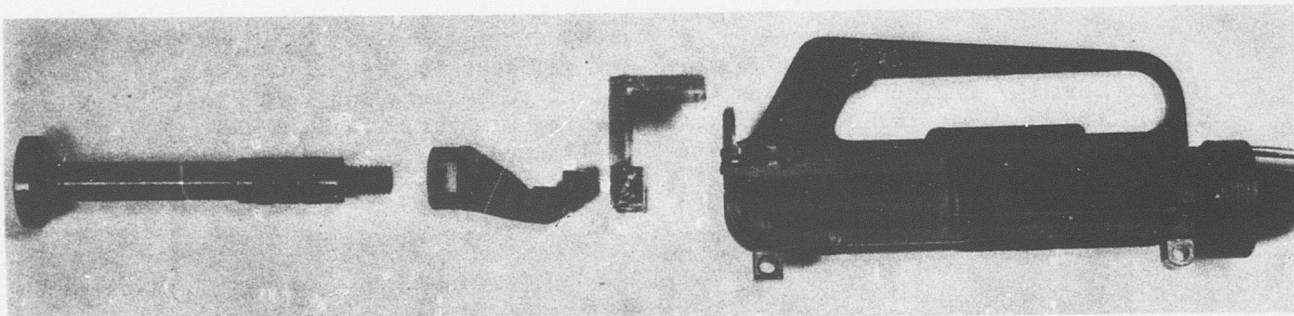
Parts of Fixture Used to Load Charging Handle Latches. Hook-Shaped Fixture Engaged the Charging Handle, Inside Receiver, at Rear Shoulder of Carrier Key Channel.
